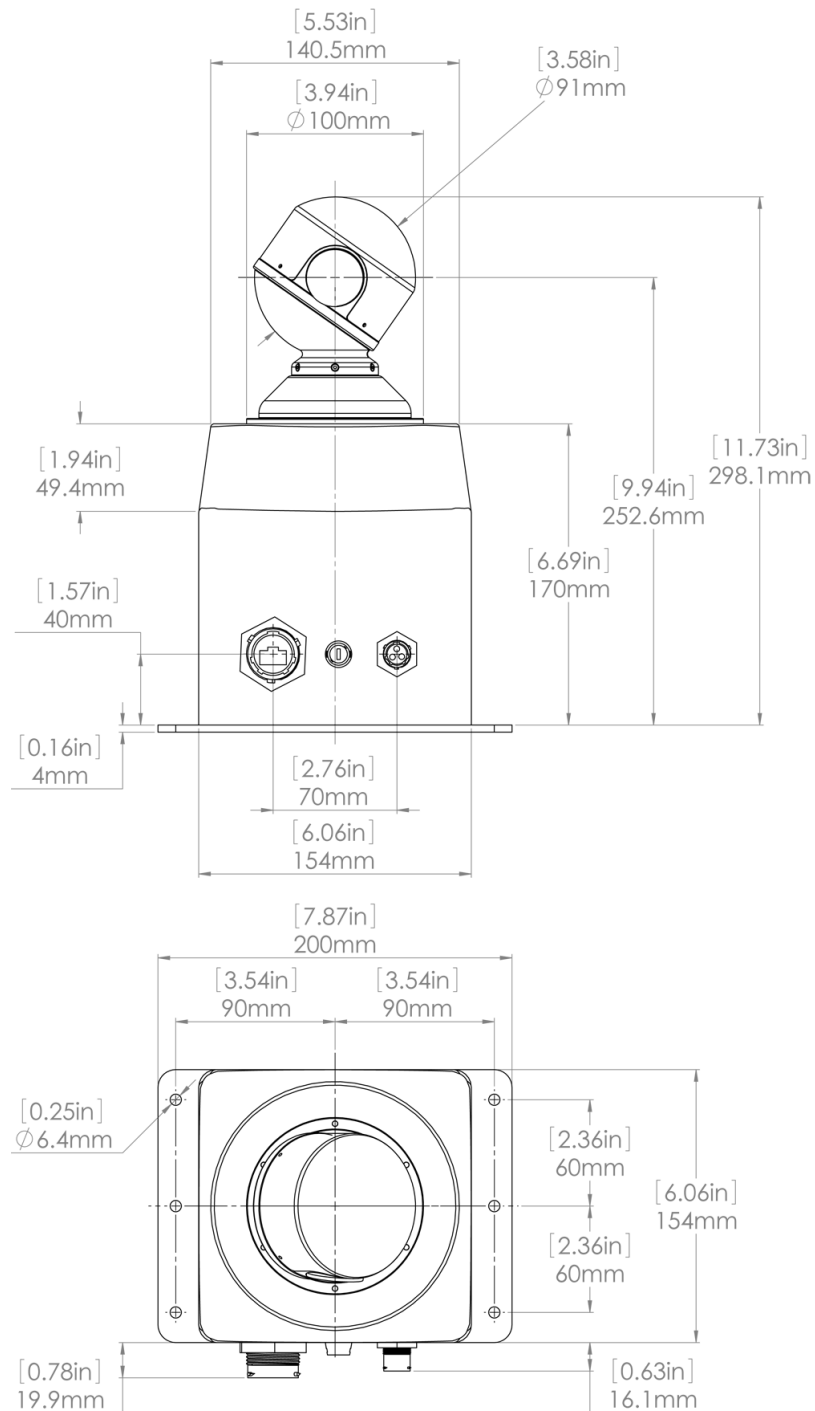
RE05 Mechanical Dimensions (IP65 ver.)
